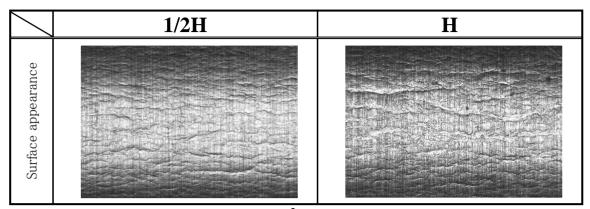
Surface appearances of 90° W-shaped bending test specimens(R/t=1.0). Thickness = 0.20mm, Width =10mm, Good Way
